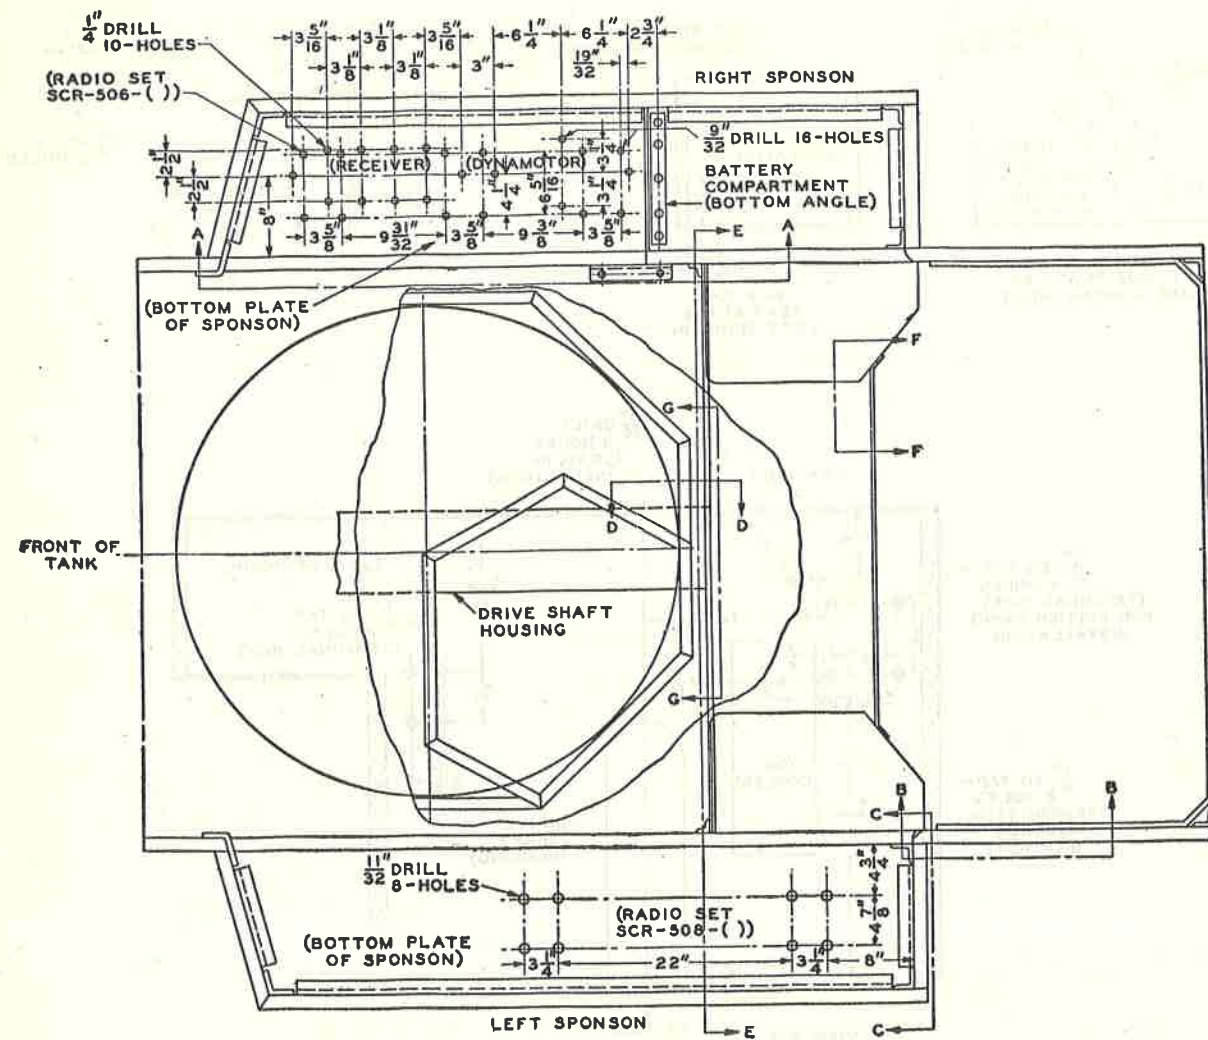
Mounting holes and location for radio equipment in Light Tank M3.
